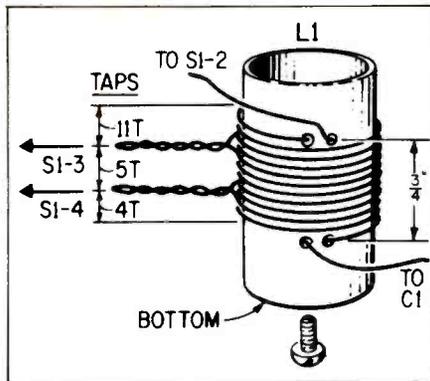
L1 details. Drill two pairs of holes in form $\frac{3}{4}$ " apart. Fish wire through bottom holes, then start winding and pull out loops for taps.
